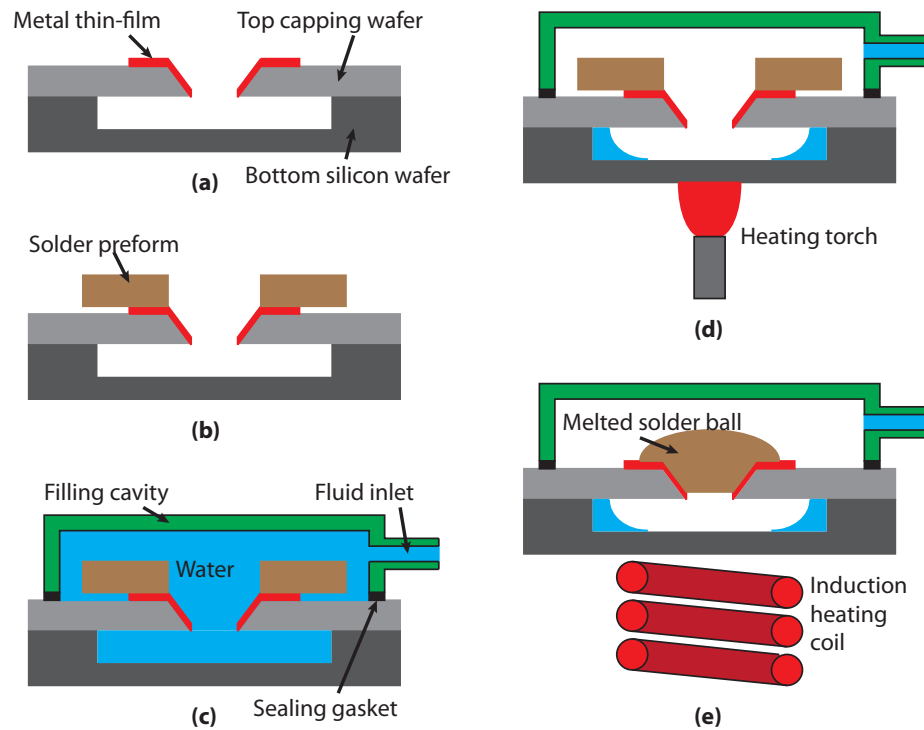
A hermetic sealing approach for sealing the μ LHP device during the high-temperature degassing and fluid-filling process: (a) Pattern metal thin-film; (b) Place preformed solder ball; (c) Attach gasket-sealed filling-cavity, and degas and fill the device with water; (d) Boil off water from the vicinity of the fill-hole; (e) Inductively melt the solder to seal the hole.
